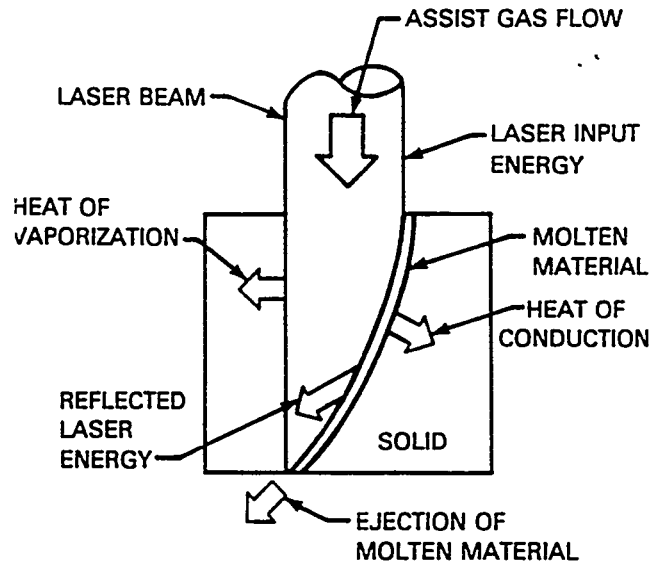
Mechanism of Laser Cutting of Metal using Assist Gas to Remove Molten Metal from Kerf (from AWS Welding Handbook, Vol 2, American Welding Society, 1991)
